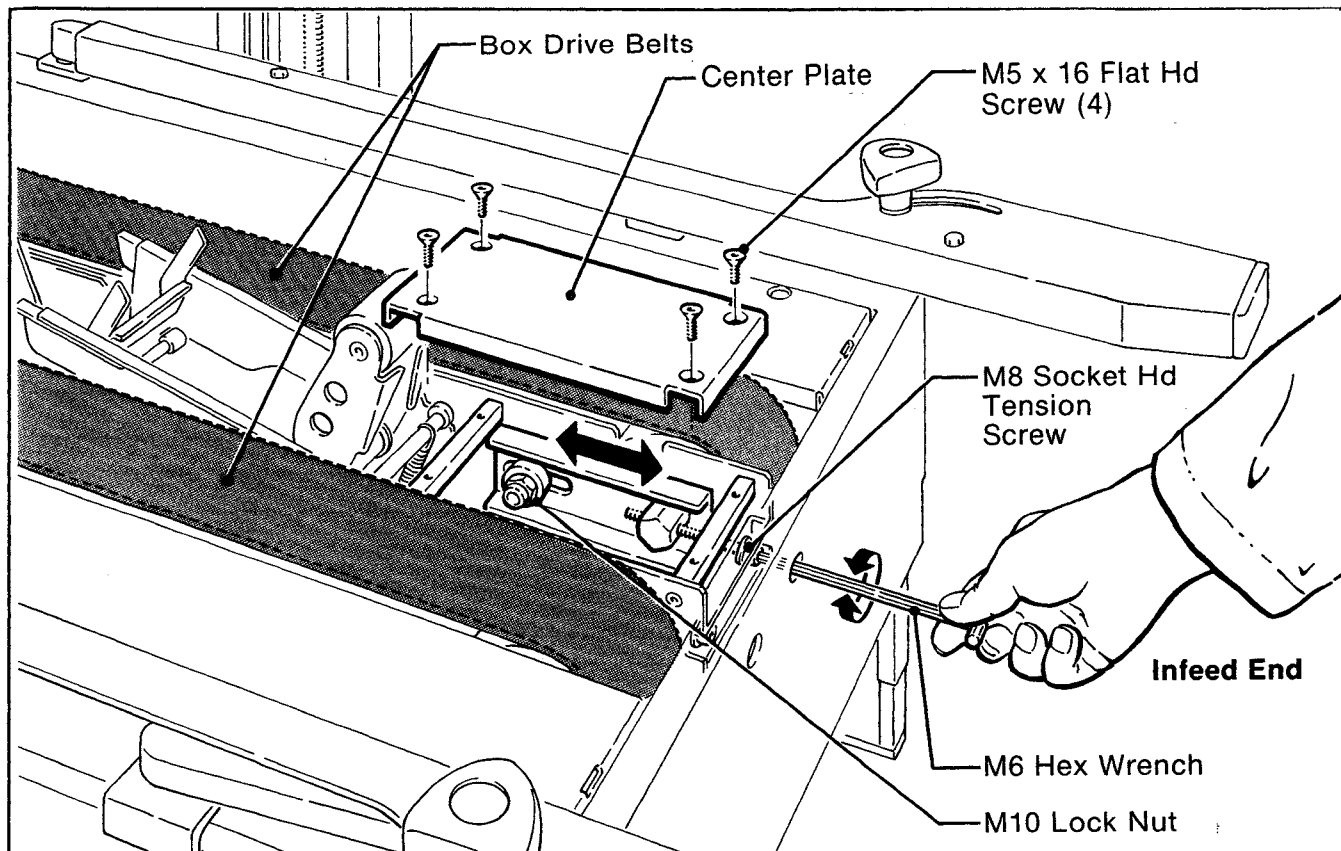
Box Drive Belt Tension Adjustment, Lower Belts (Infeed End)
